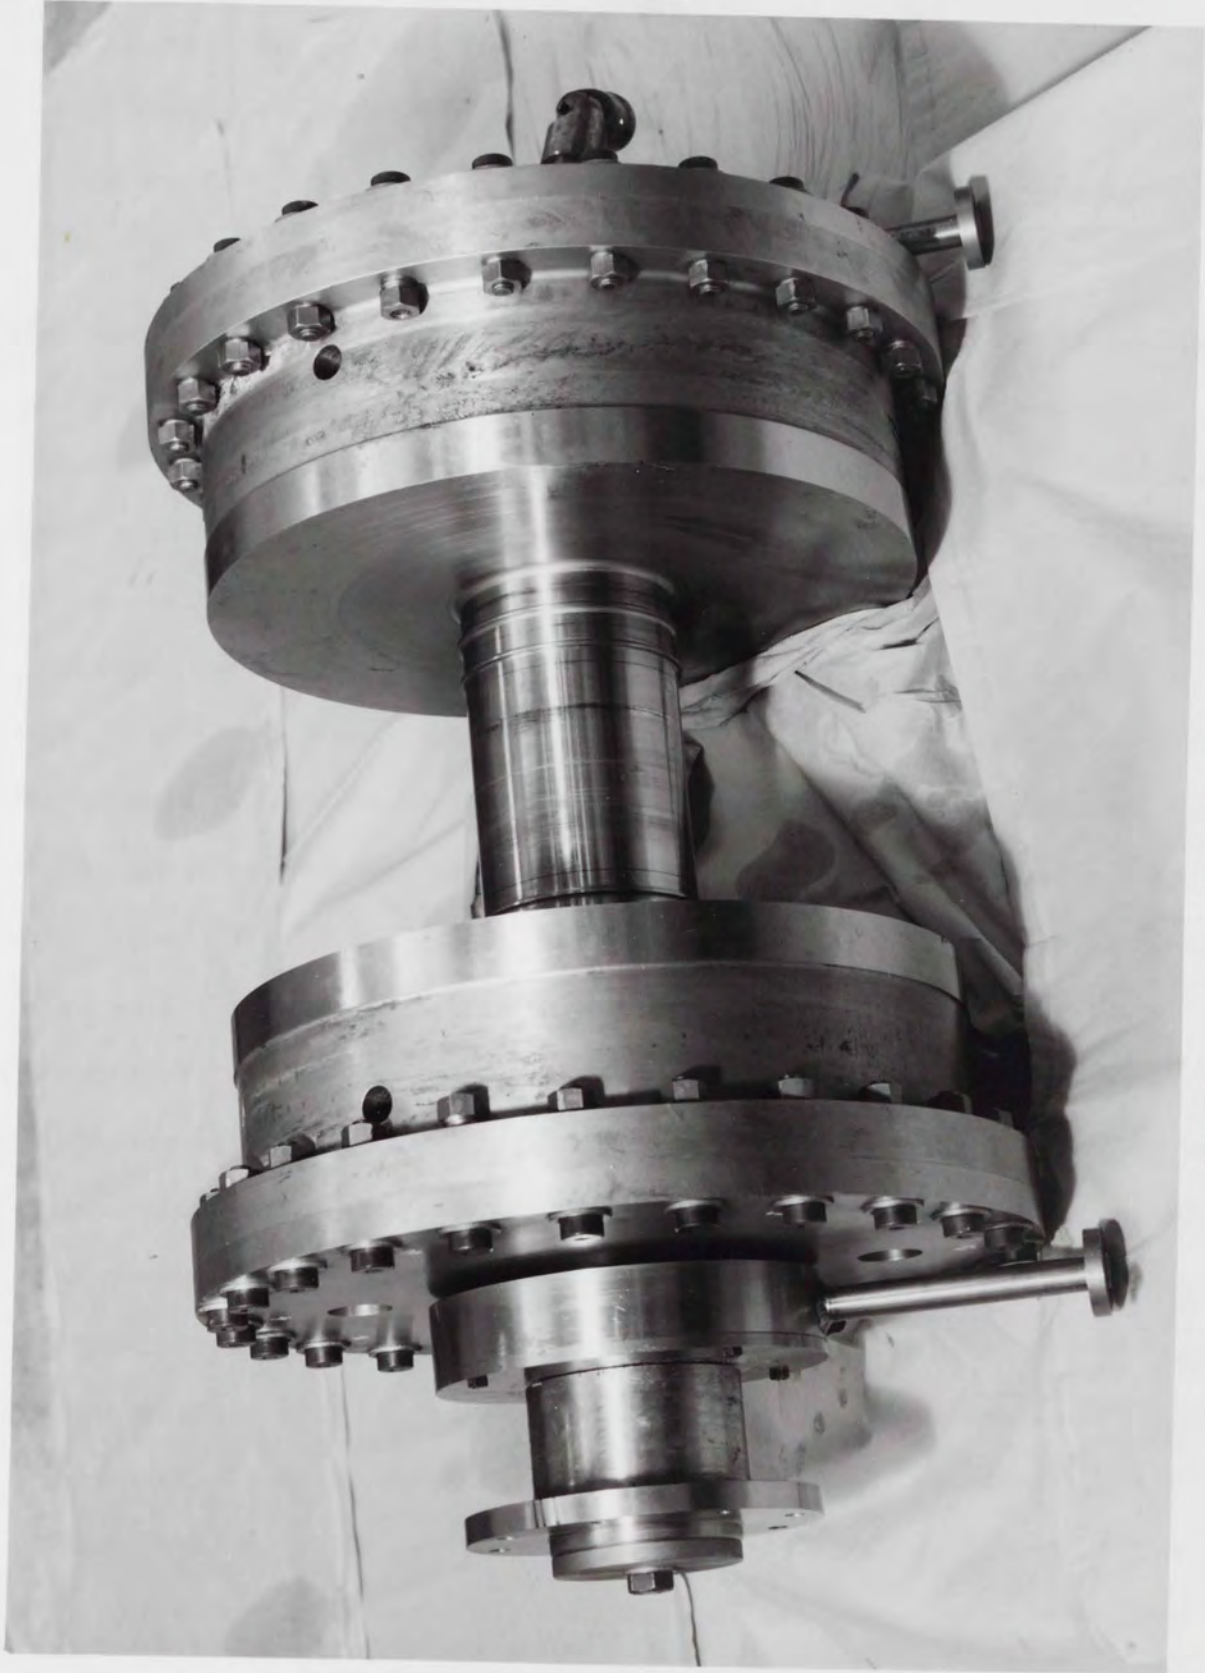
THE MAIN ROTOR ASSEMBLY
